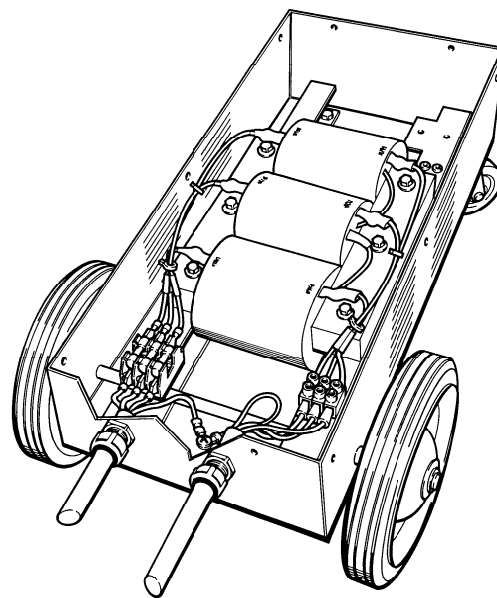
Wheels and Casters Installed on 600V Transformer Case
